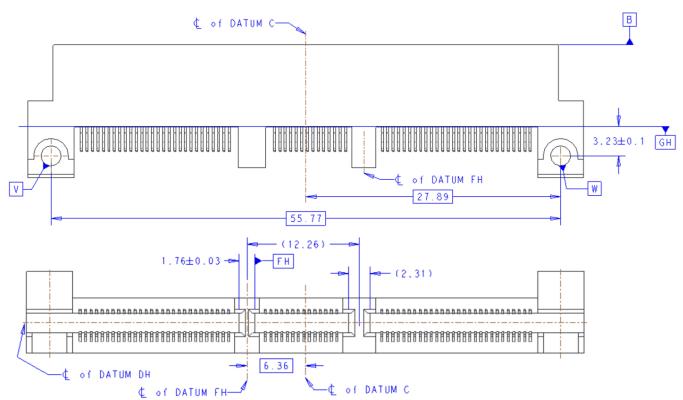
4C STRADDLE MOUNT CONNECTOR DIMENSIONS - REAR VIEW (MM)
